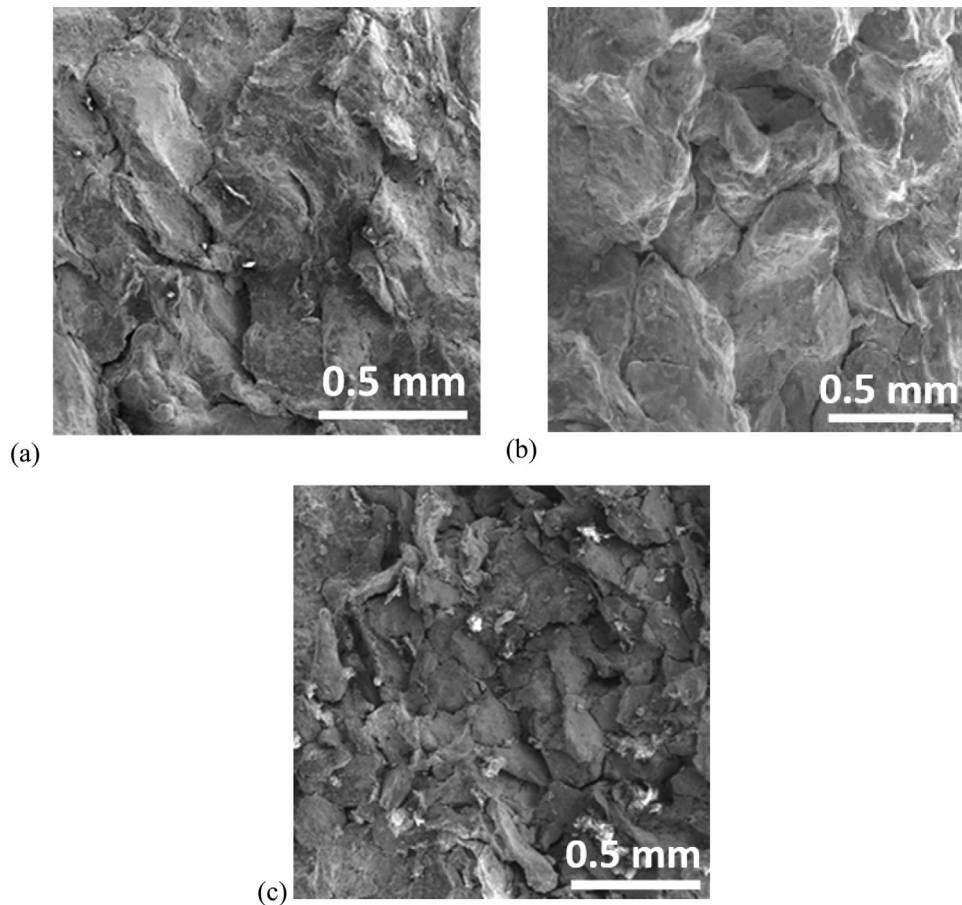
Fracture surfaces from fracture toughness tests of the swaged NiAl compacts: (a) swaged with 18.8 mm core; (b) swaged with 12.7 mm core; (c) swaged with no core.
